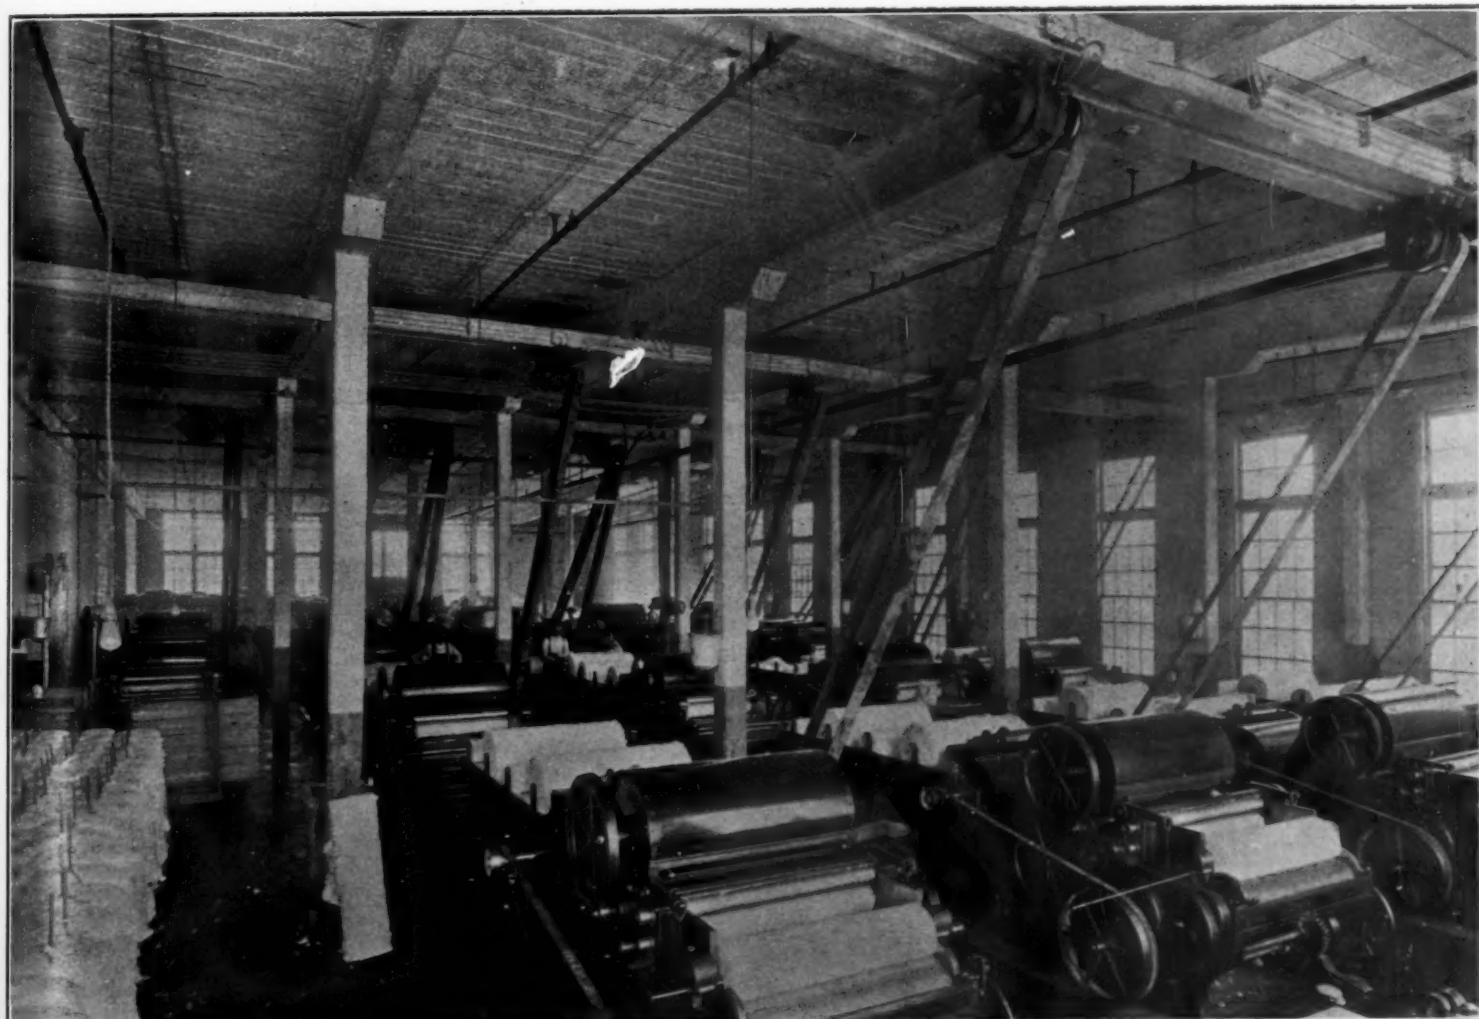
PICKER-ROOM, SHOWING MOTORS BELTED DIRECT TO BEATER SHAFTS.
